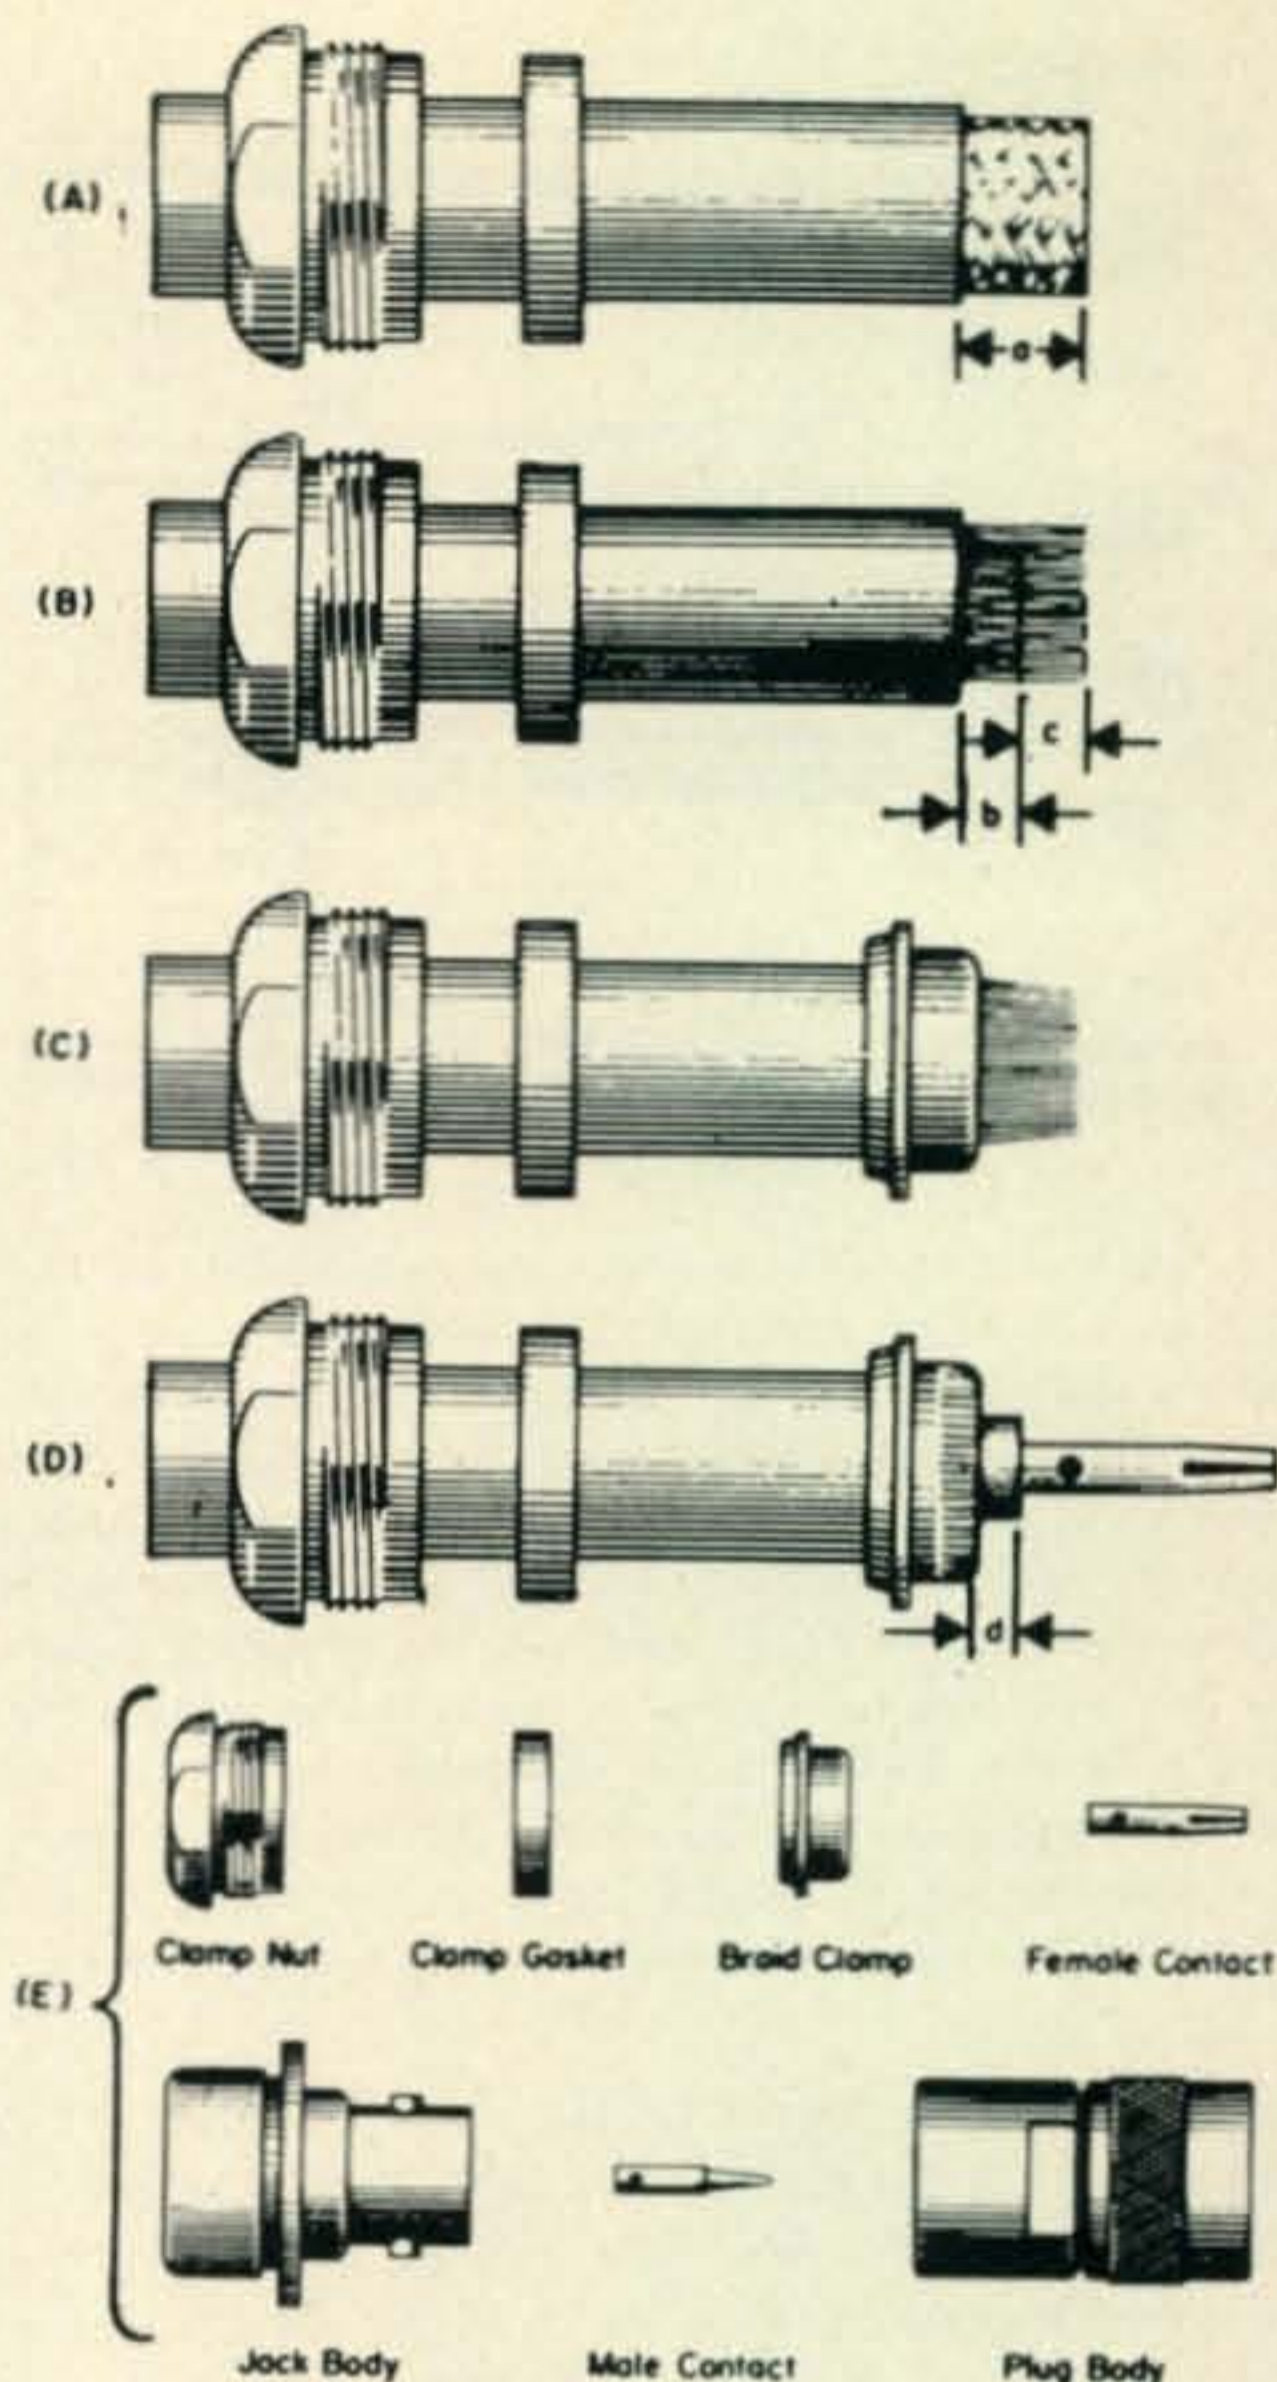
Assembly technique for the Amphenol type "C" connector is shown above. This unit is suitable for high power above two meters and is an ideal weatherproof unit. Slide the nut and gasket over the cable as shown in (A) and cut the jacket to dimension  $a$ . For RG-8/U this is  $\frac{5}{16}$ " and for RG-58/U,  $\frac{3}{8}$ ". Comb out the braid as shown in (B) and cut the insulator. For RG-8/U  $b$  is  $\frac{5}{32}$ " and  $c$  is  $\frac{5}{32}$ " while for RG-58/U  $b$  is  $\frac{7}{32}$ " and  $c$  is  $\frac{5}{32}$ ". Pull the braid wires forward and taper them towards the center conductor. Place the clamp over the braid and push it against the cable jacket as shown in (C). Illustration (D) shows how the braid is folded back, trimmed and formed over the clamp. The contact is then soldered to the center conductor. Dimension  $d$  should be  $\frac{3}{64}$ " for RG-8/U and  $\frac{9}{64}$ " for RG-58/U. Insert the cable and parts into the connector body making sure the sharp edge of the clamp seats properly in the gasket; tighten the clamp nut. The component parts should be arranged in the order shown in (E).
